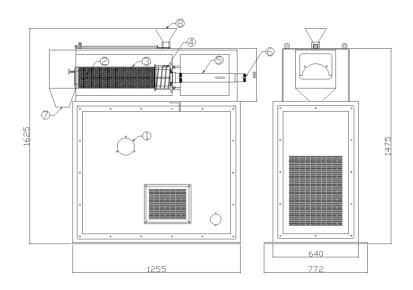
Schematic diagram of a cutting type milling machine. ① air suction inlet, ② cutting roller, ③ metallic mesh, ④ screw, ⑤ main shaft, ⑥ main shaft air inlet, ⑦ milled rice outlet, ⑧ brown rice inlet.
